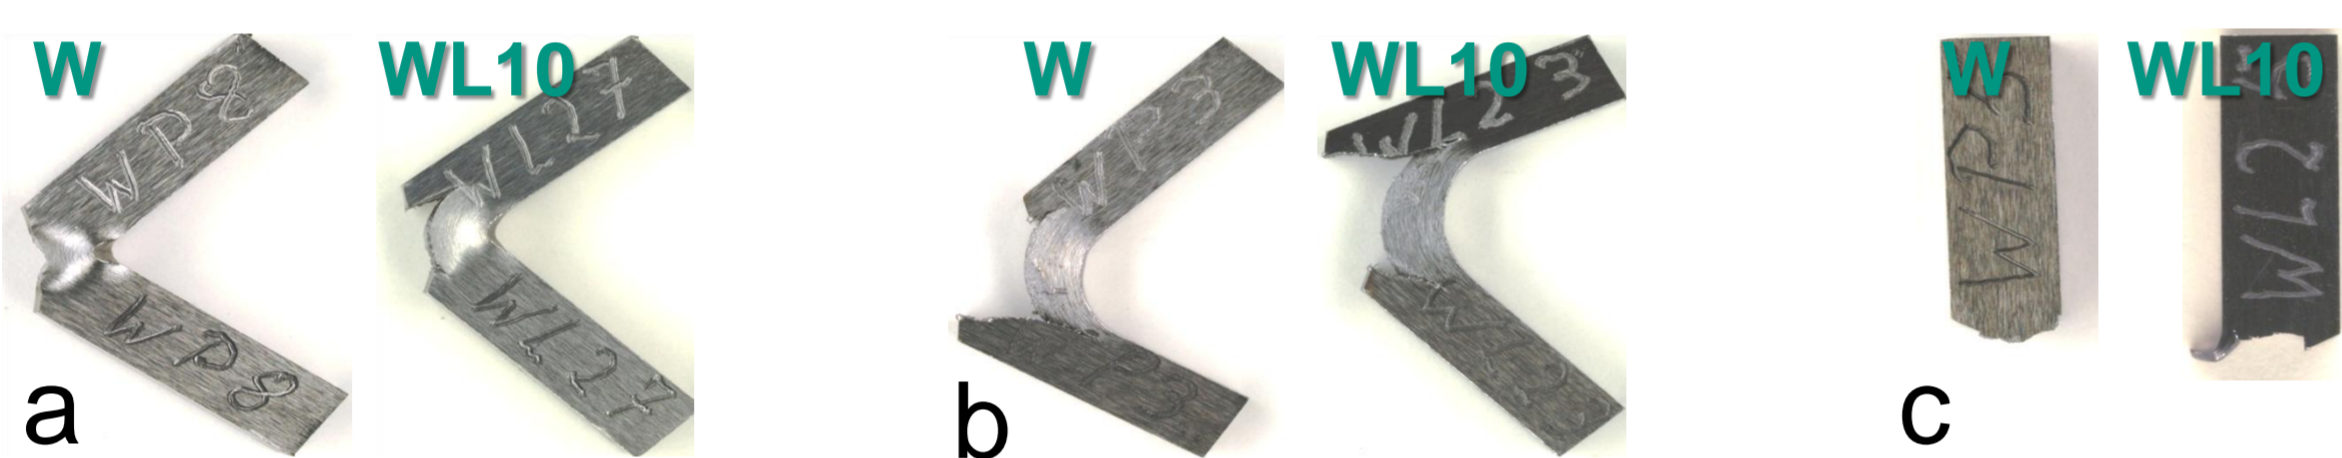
Fractured specimens of pure tungsten and WL10 at: (a) 900 °C, (b) 600 °C, and (c) 400 °C.
